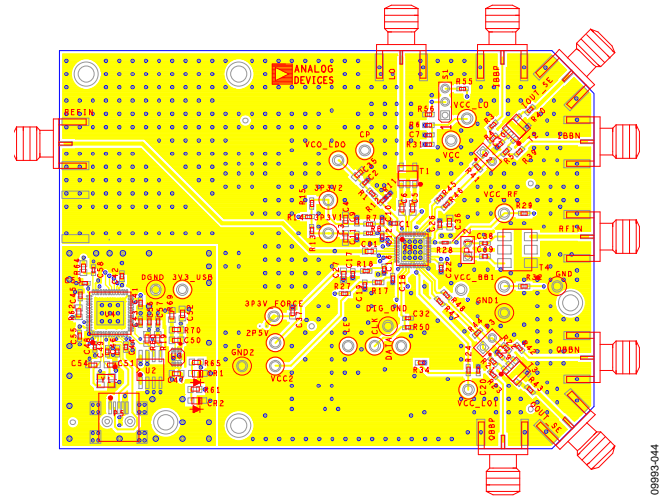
[ADRF6807](#) Evaluation Board Top Layer
